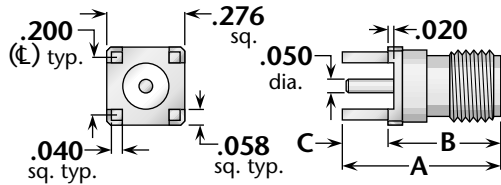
(Rear mount, solder pot contact, no mounting gasket)
